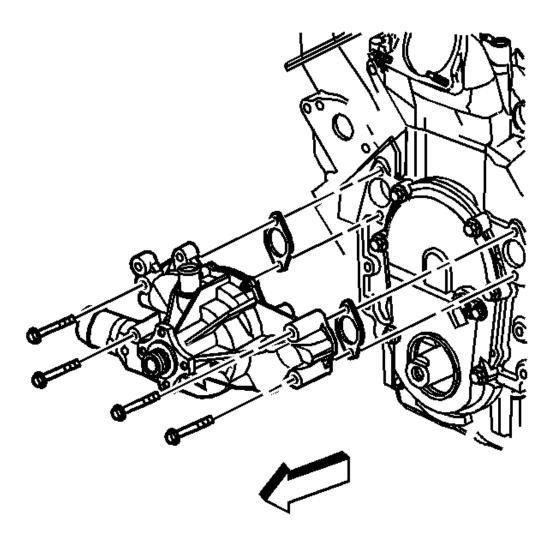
View Of Water Pump & Gasket Courtesy of GENERAL MOTORS CORP.
